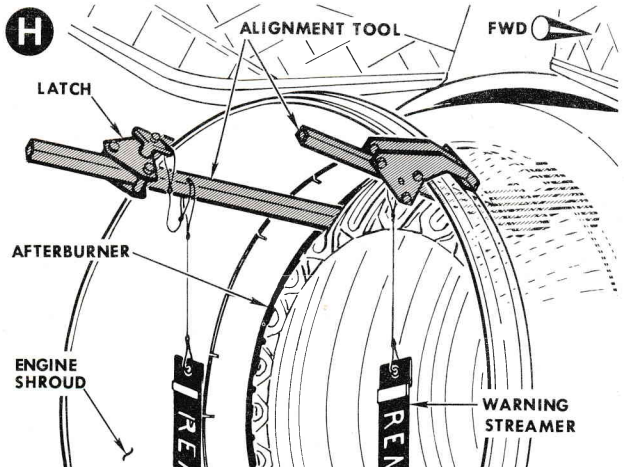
Replacement, Engine Shroud Using Stand USAF ETU-8/E (Sheet 3 of 4)
